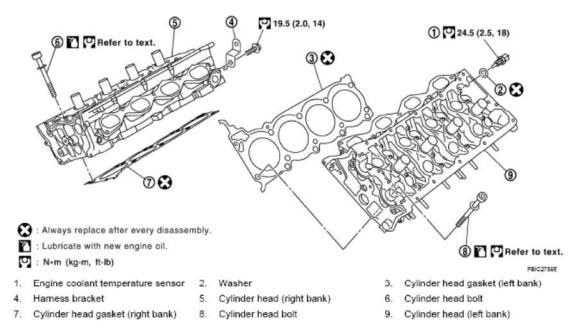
Identifying Cylinder Head Components With Torque Specifications
